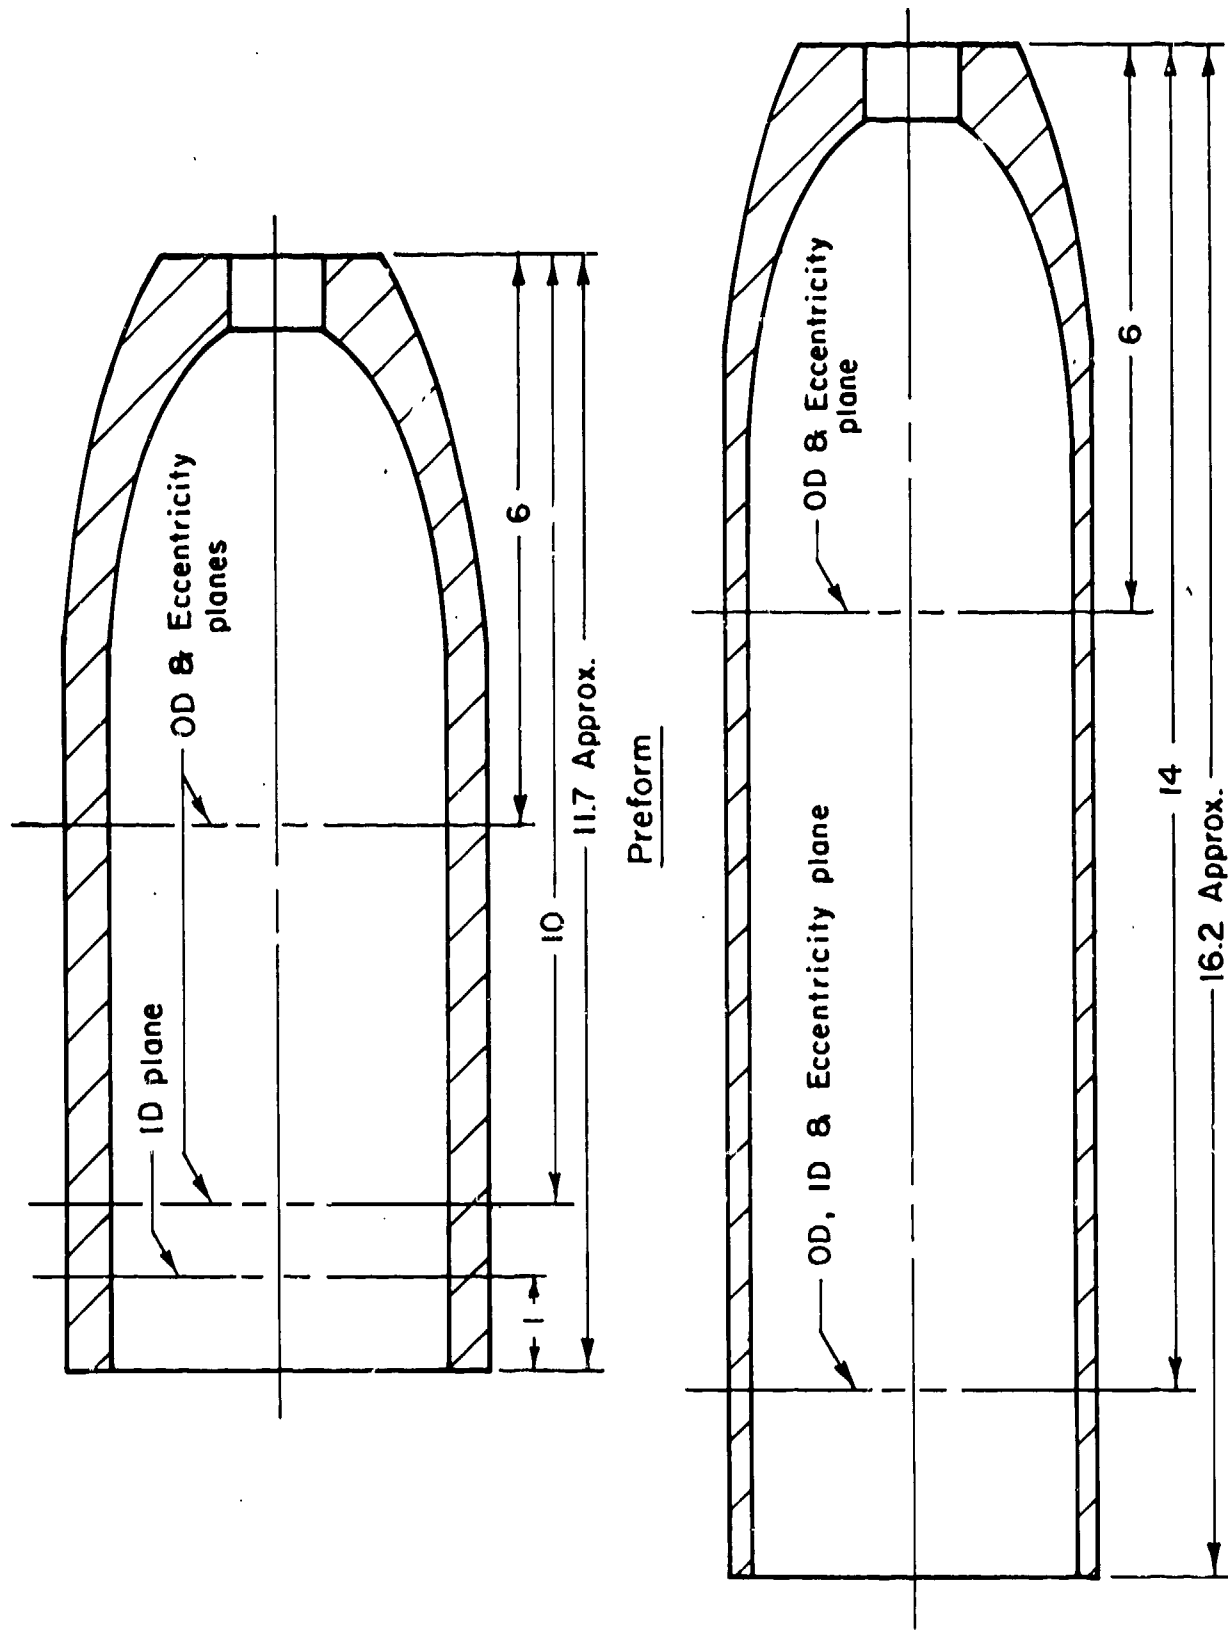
Location of dimensional measurements on M335 shell preform and product.
